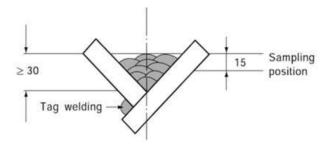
Deposited Weld Metal Test Assembly (Unit: mm)
